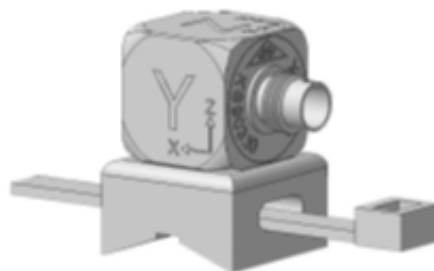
8.Handle adapter 141 for attaching on the surface handle
